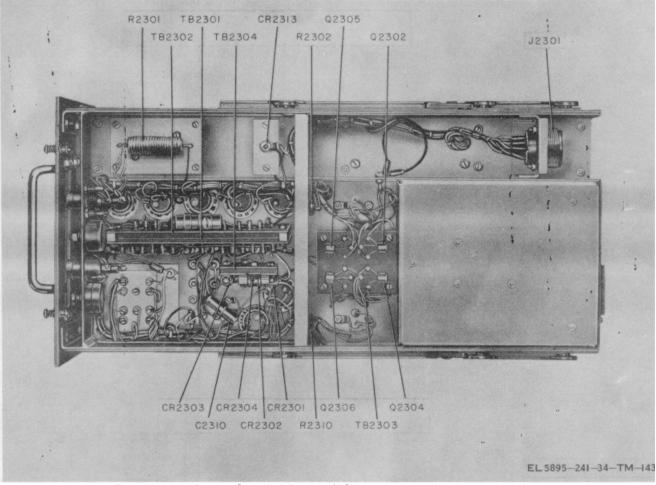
Power Supply PP-2795/FSW-8, bottom view, parts location.
